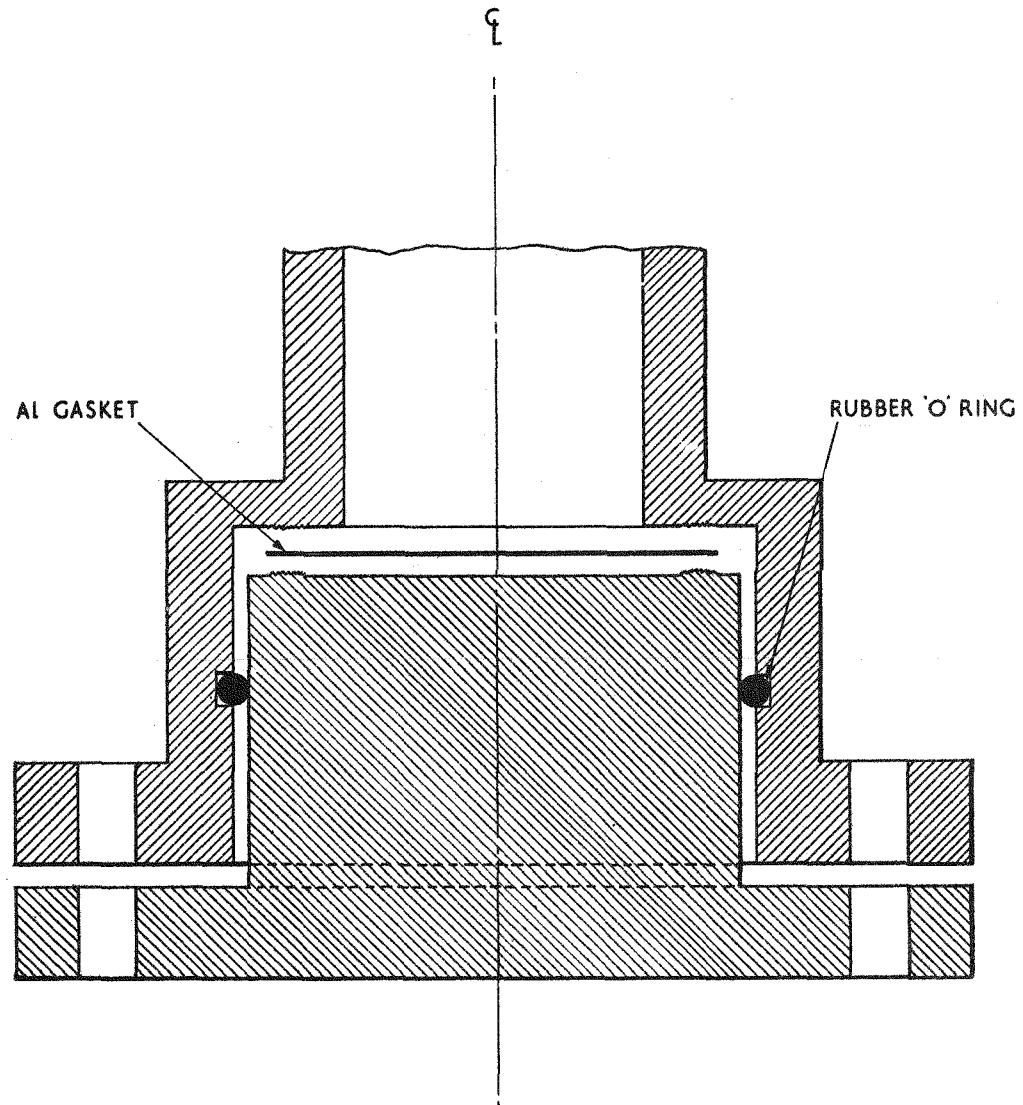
METHOD OF BLANKING-OFF FLANGES N. OF PRESSURE VESSEL
